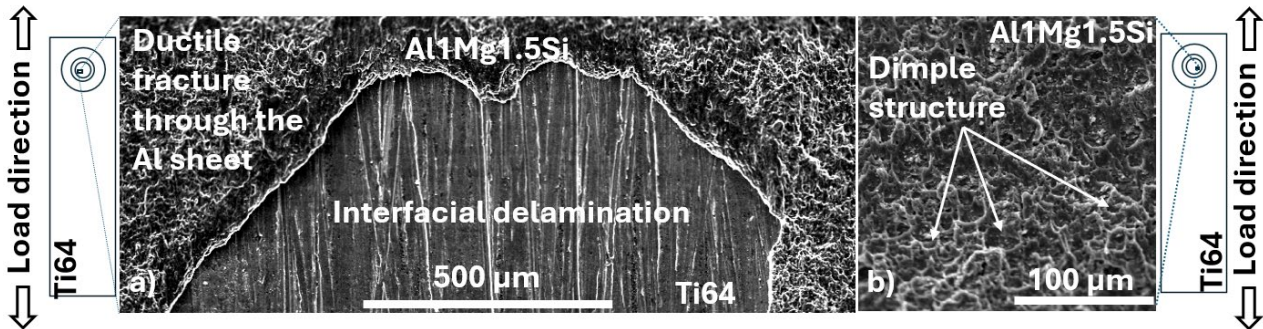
Fracture surface of a) a PD 1.5 mm, #320 Al1Mg1.5Si / Ti64 joint, highlighting the mixed failure mode of partially interfacial delamination and partial through the Al side with Al being attached to the Ti64 surface, and b) a highlighted area of the PD 1.5 mm, #320 Al1Mg1.5Si / Ti64 joint fracture surface, showing the fracture locally through the Al in a ductile behavior indicated by the observed dimple structure.
